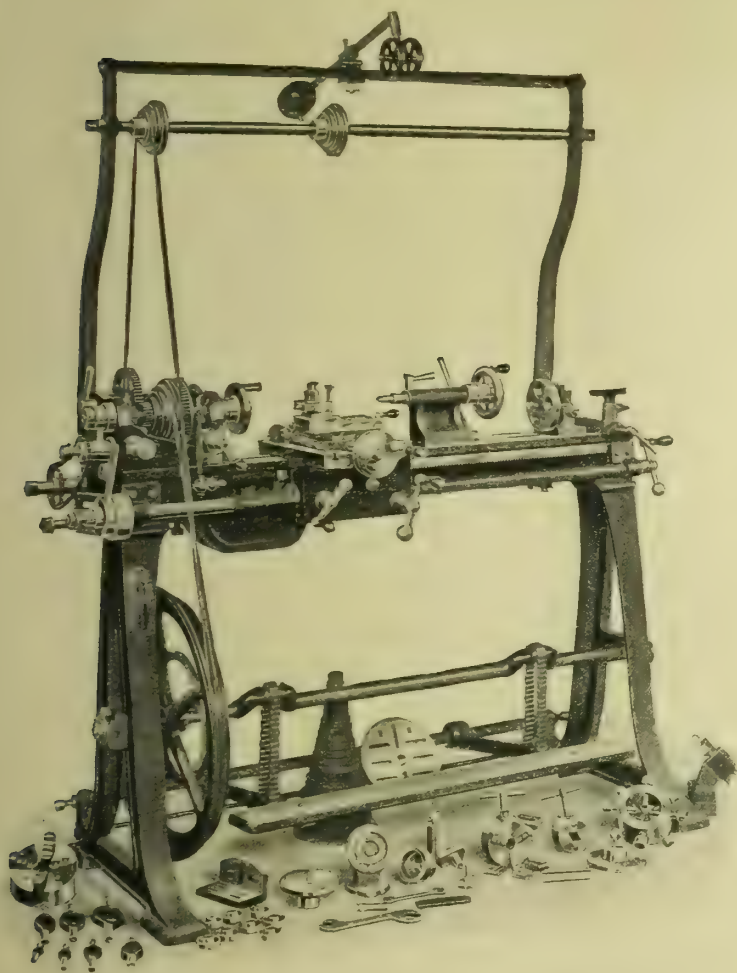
4½in. CENTRE LATHE WITH OVERHEAD GEAR, SHOWN BY MR. HENRY MILNES, BRADFORD.
